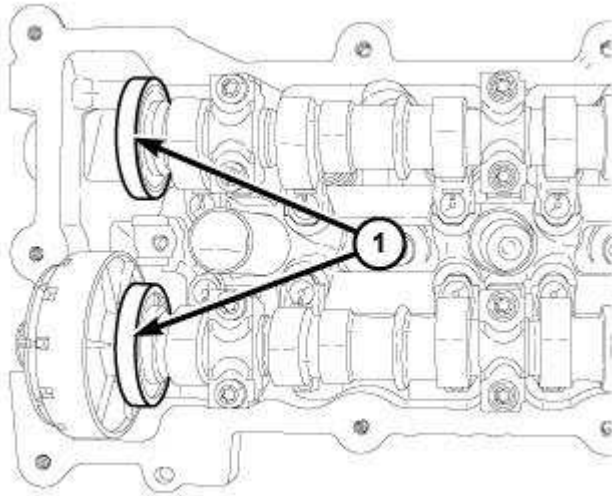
Arrows, Scribe Lines & Cylinder Head Cover Mounting Surface
